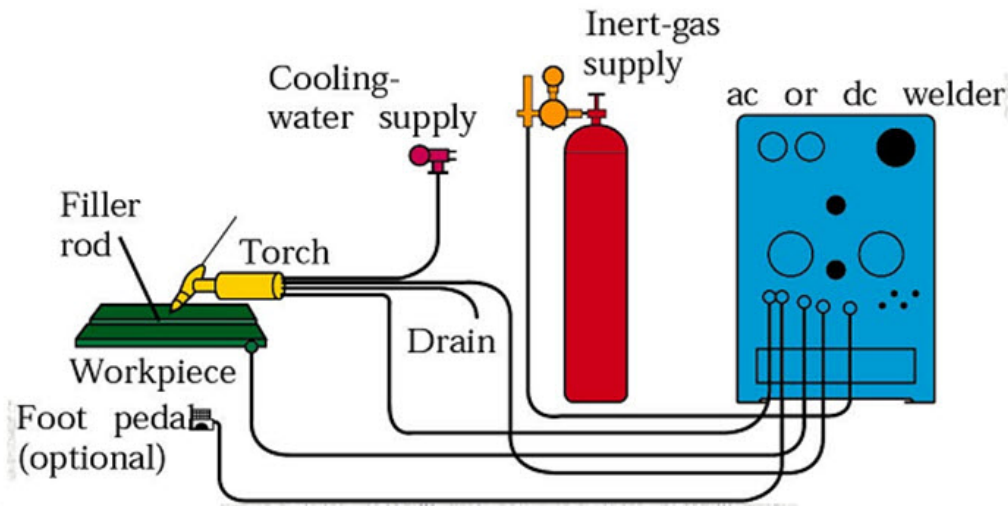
Equipment for gas tungsten-arc welding operations. (Source: American Welding Society.)
